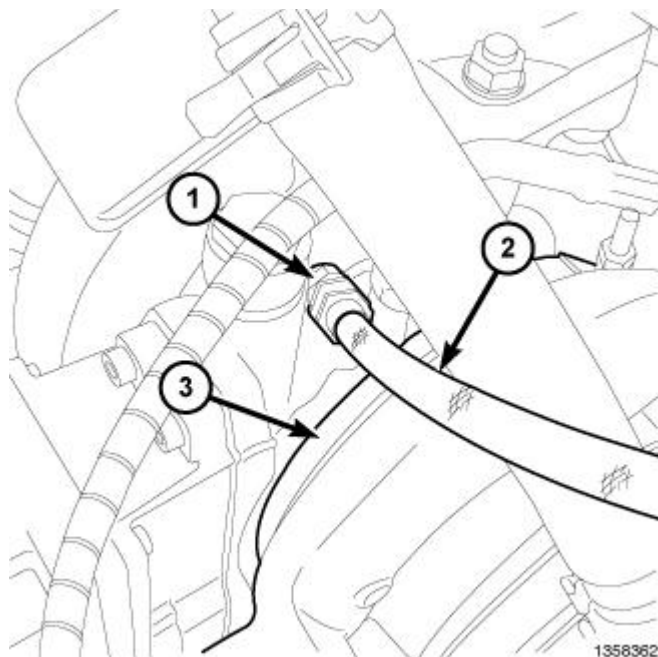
Identifying Nozzle, Cleaning Tool Hose & Turbocharger
